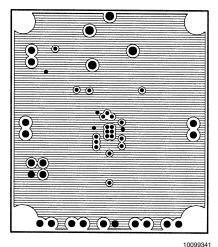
Recommended LQ PC Board Layout: Upper Inner-Layer Layout
